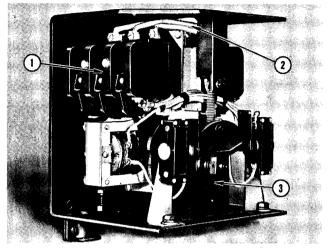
REMOVING MAIN SWITCH 1. Main Switch 2. Leads 3. Bearing Retainer
